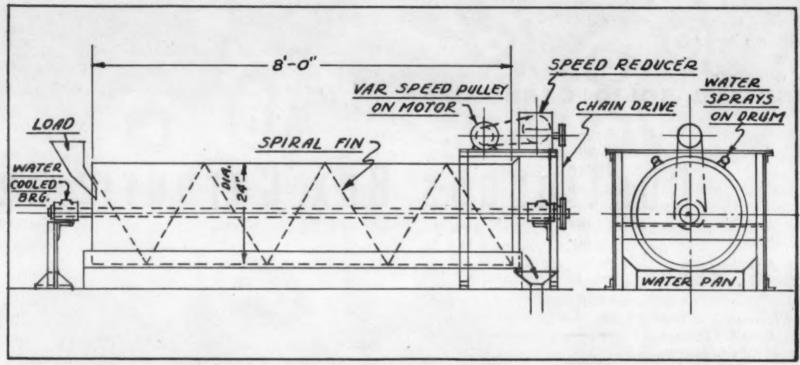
Details of the Rotary Cooling Drum at the Bottom of the Hopper. In this the compound is cooled from about 1100 deg. F. (Courtesy: Claude B. Schneible Co., Chicago)
